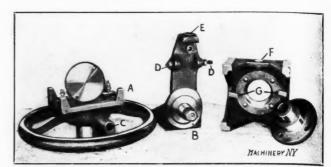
Jigs for Drilling Parts of Device shown in Fig. 5
